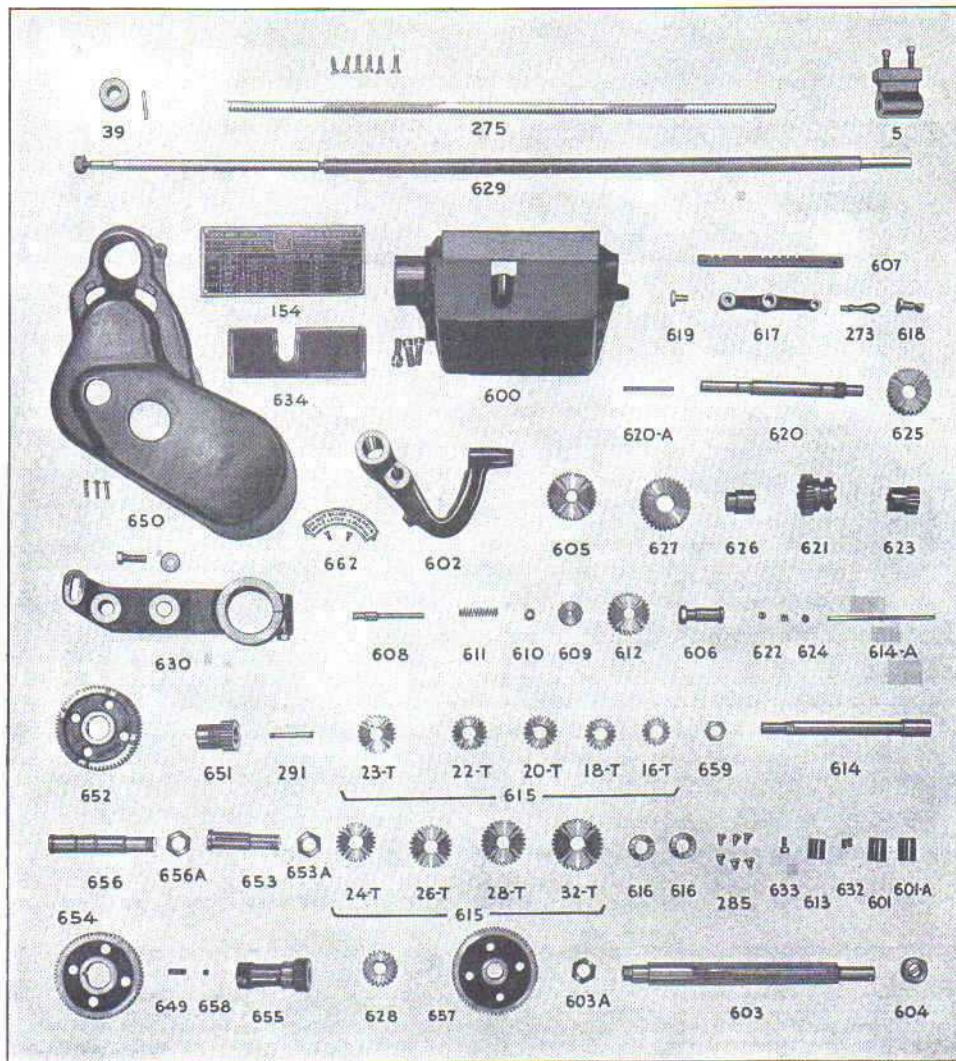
Quick Change Gear Box Parts for South Bend Quick Change Gear Lathes.
